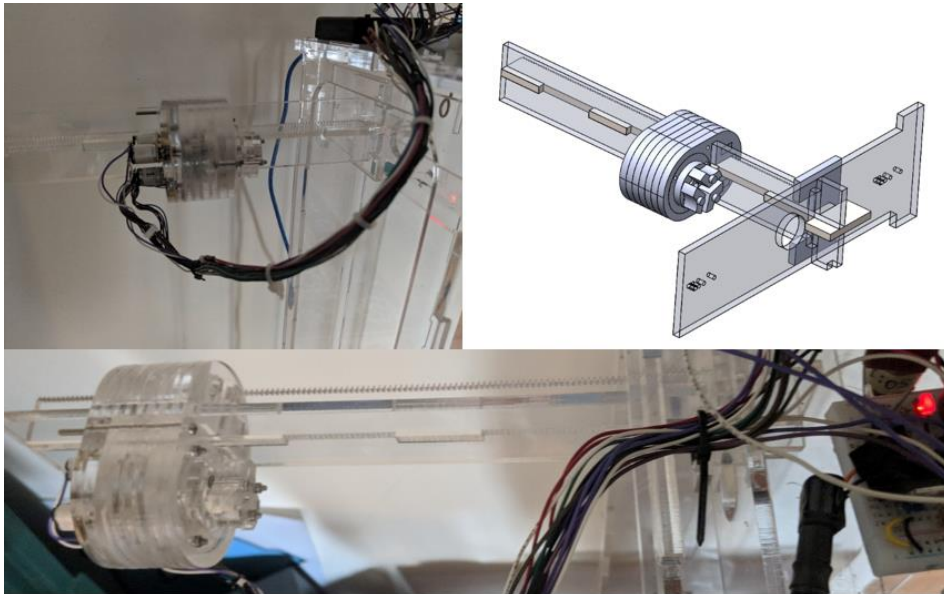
Rack, Track, and Coiling Machine Assembly. The Coiling Machine fit into the existing Twisting Machine. The 12" rack consists of 124 teeth. The chuck rotates and moves away from the twisting machine simultaneously
